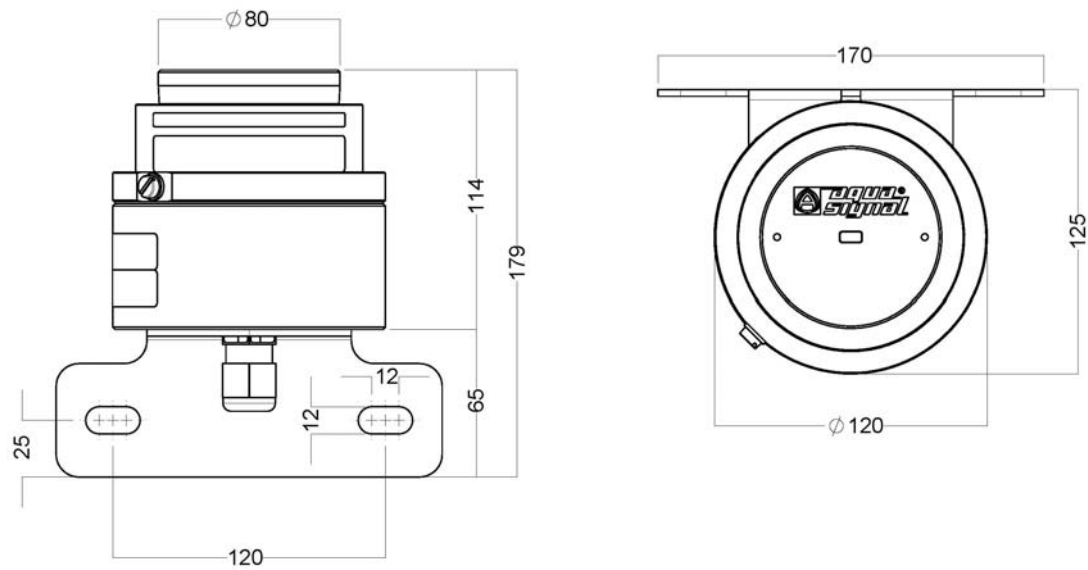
Explosion-proof luminaire Type HX55, wall mount
